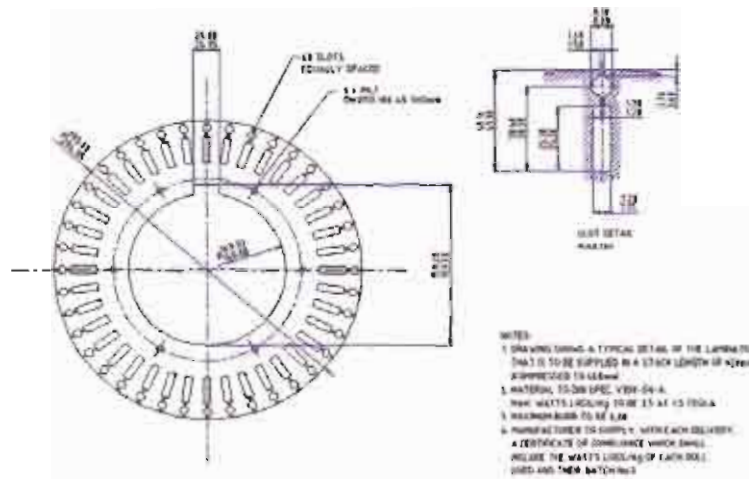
Typical manufacturing drawing of a double cage rotor lamination
